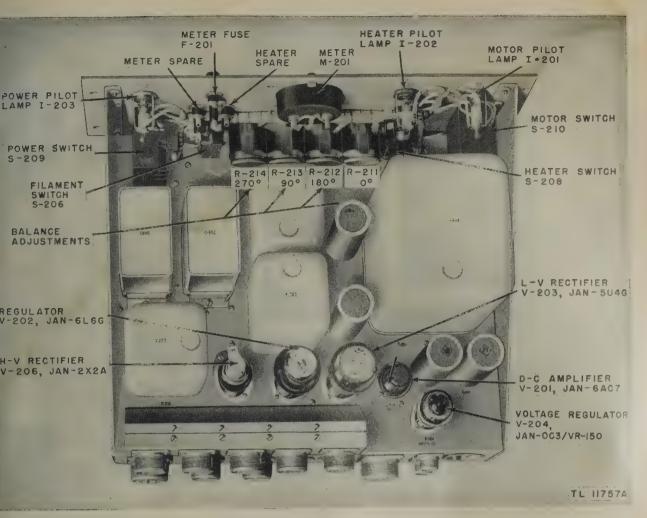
Control Panel PN-31-A, placement of parts, top view.
